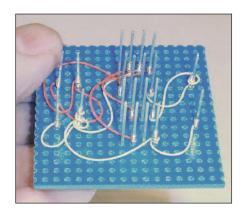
The wire wrapped circuit's components are soldered to pins or inserted into sockets that extend through the insulating board. Individual wires make the connections.
